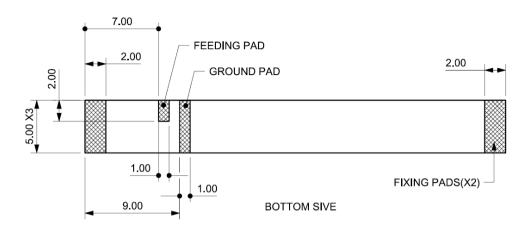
PCB BOARD SCHEMATIC PICTURE
